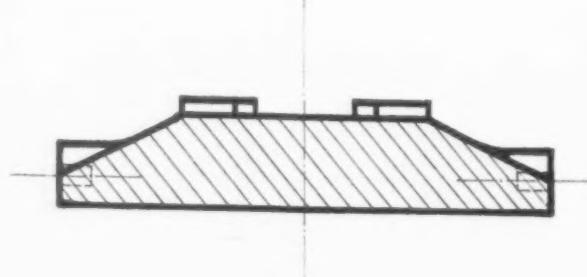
Ingot Mold Stool Used for Top Pouring of Ordinary Ingots. Material: Cast Iron
